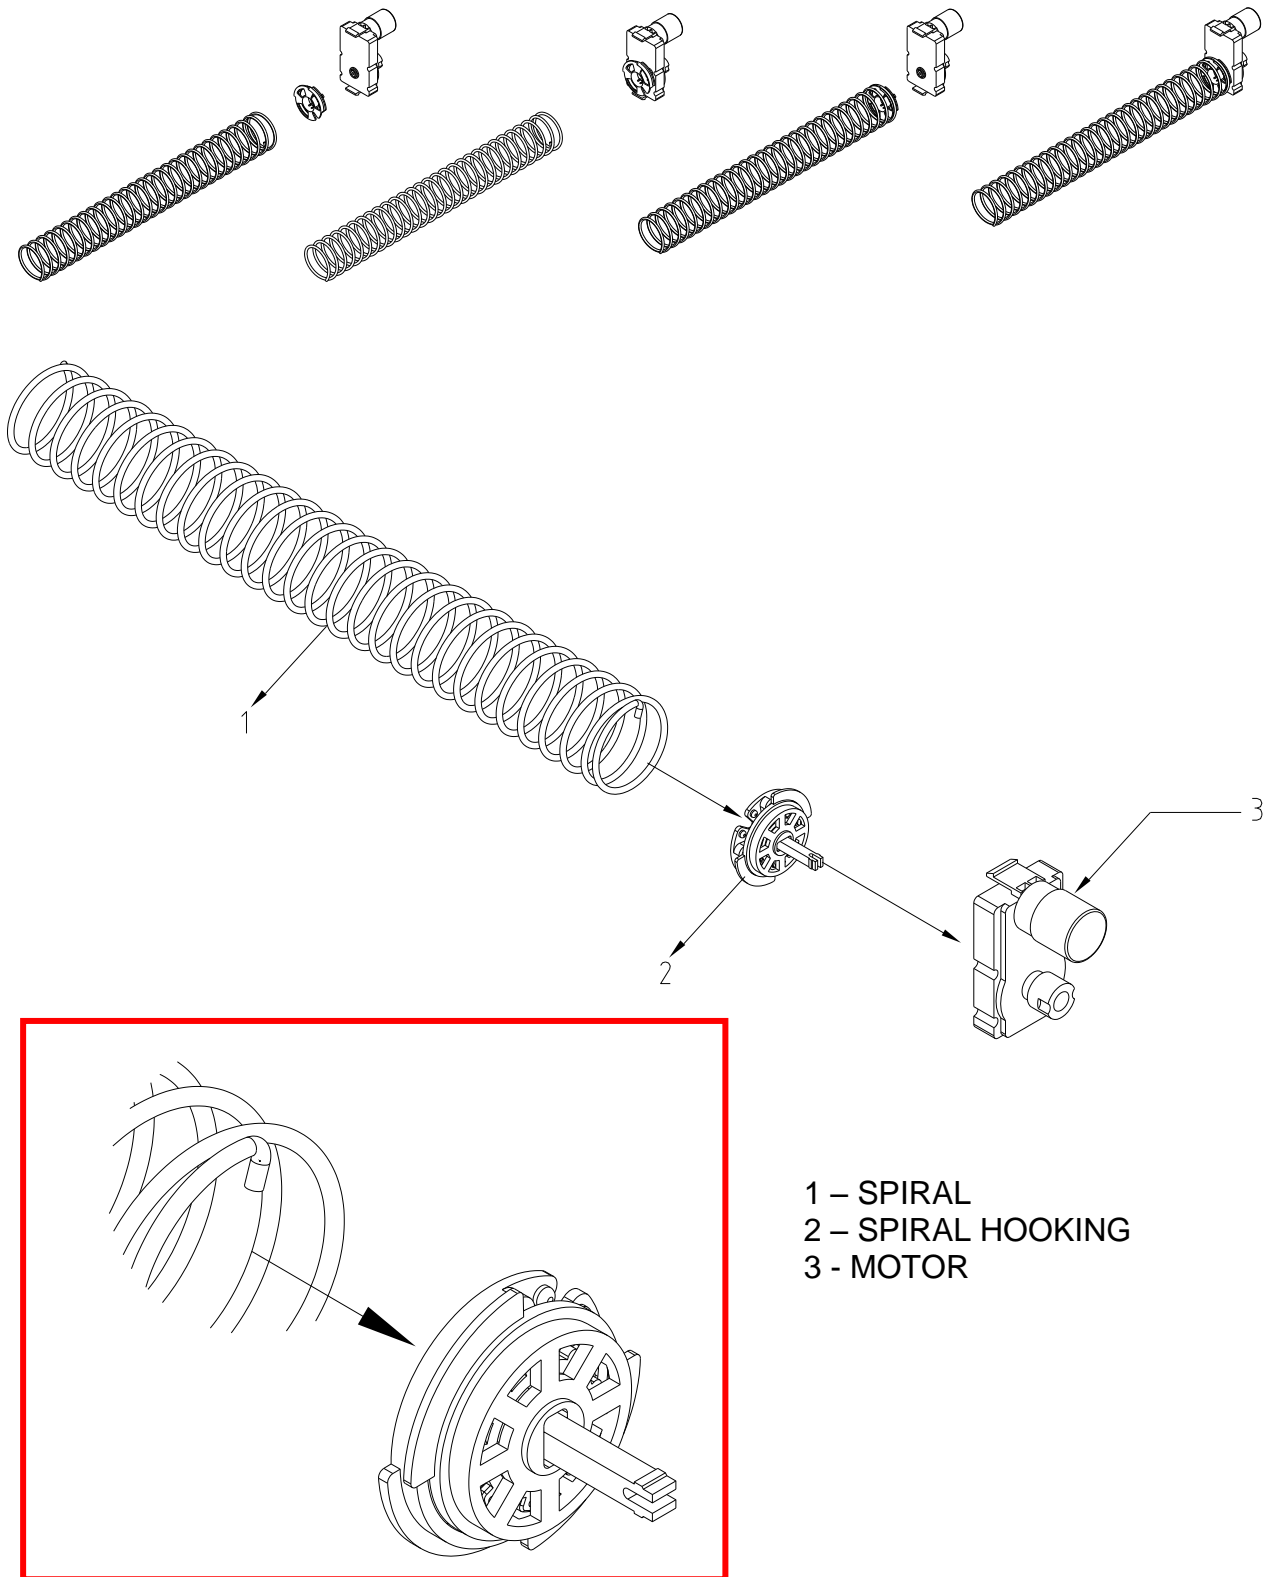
SINGLE SELCTION SPIRAL ASSEMBLING
